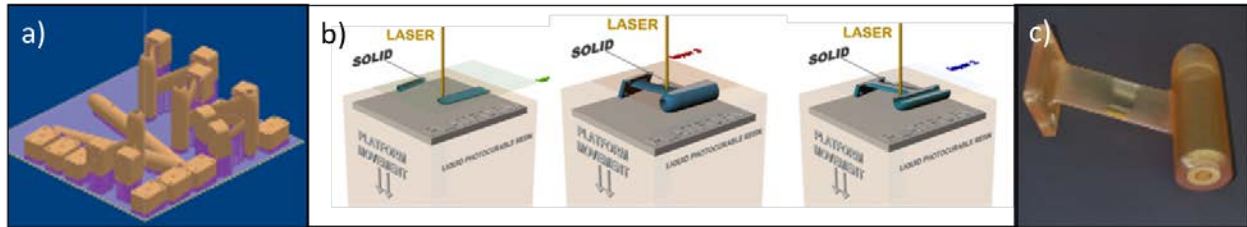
AM parts are created by a) developing a CAD model, b) physical depositing layers of the CAD file, and c) finishing the part.
